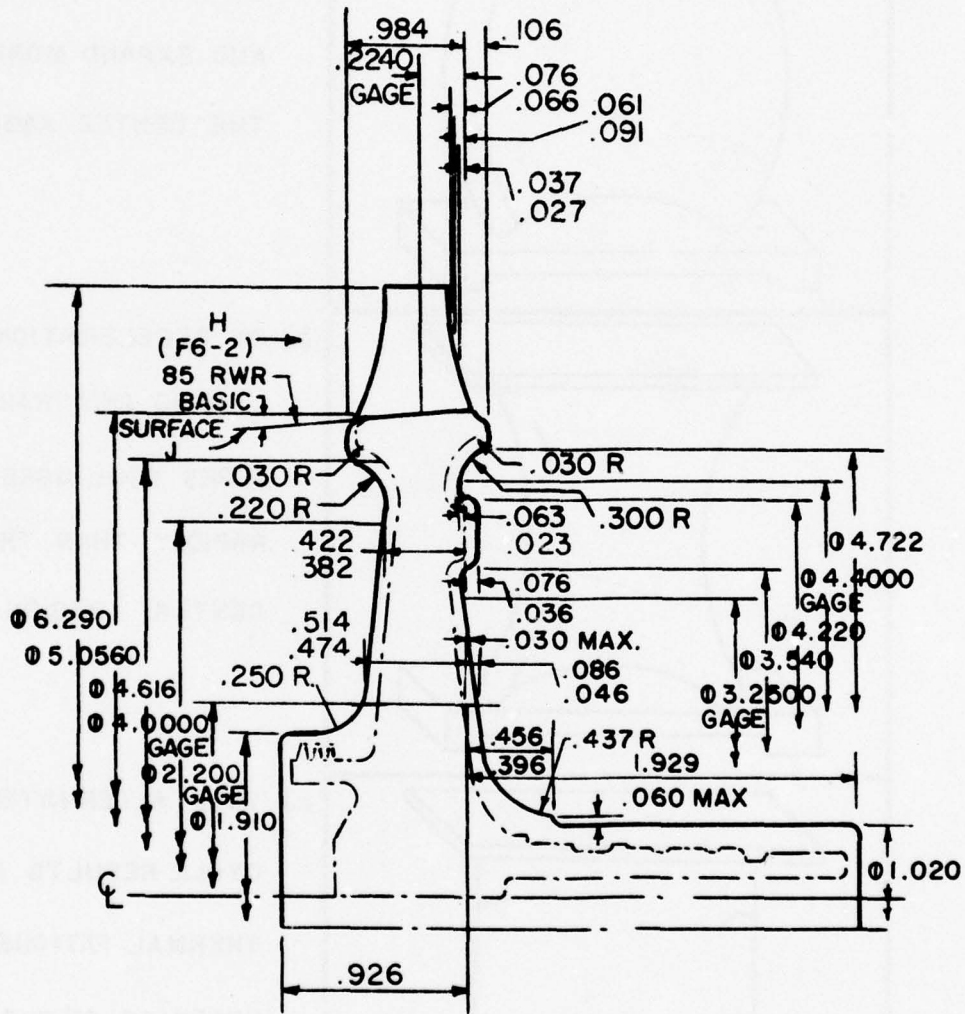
Drawing of the First Stage Turbine Rotor for the T-63 Engine.
